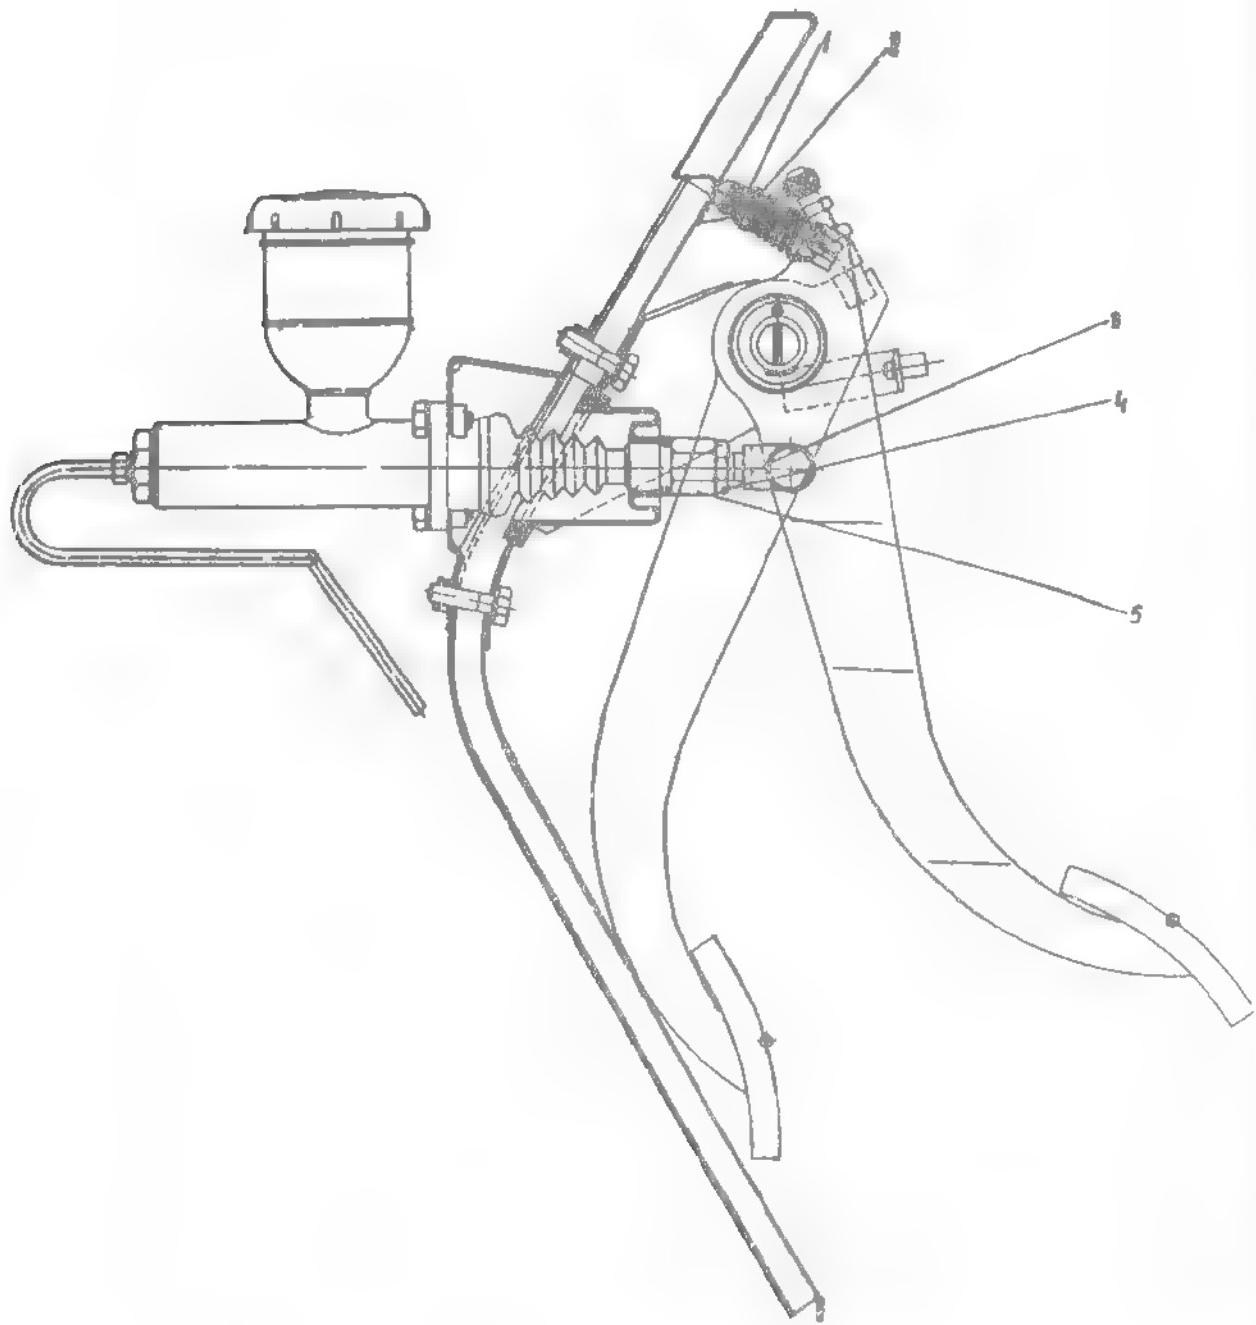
BRAKE & CLUTCH HYDRAULIC CONTROL SYSTEM
